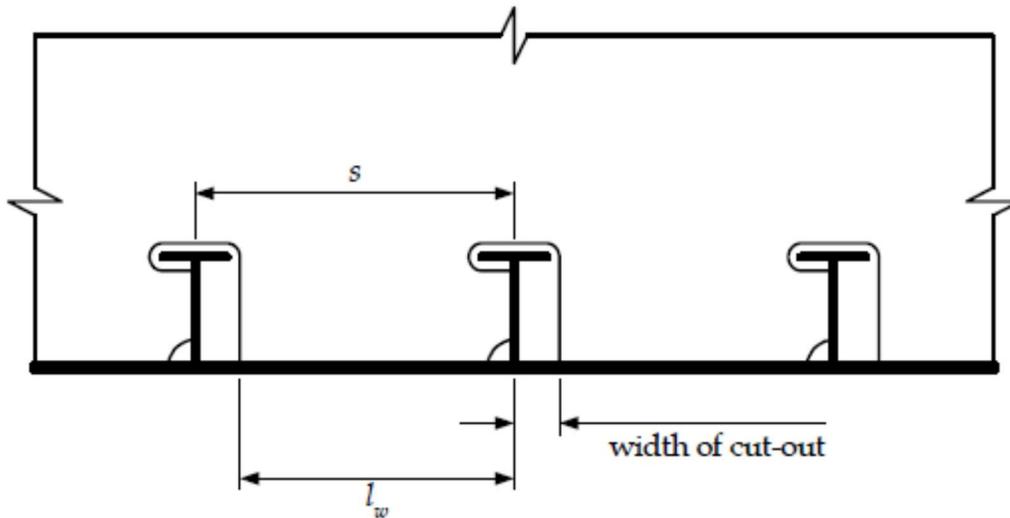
Lost Material in Web Cut-outs for Stiffeners
